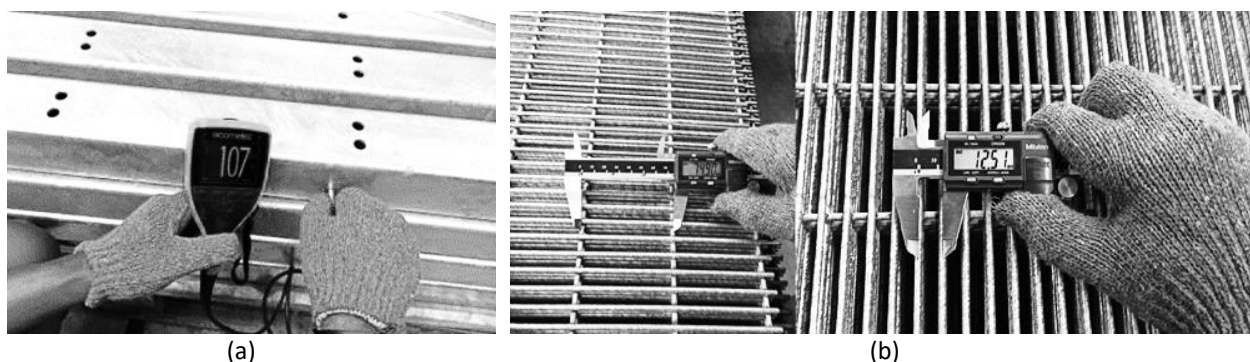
(a) Using electrometer to inspect the galvanized thickness (b) Using Mitutoyo digimatic caliper to dimensional check
